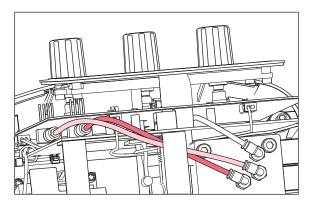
Tube connections between the Femtojet PCB and the valve block
